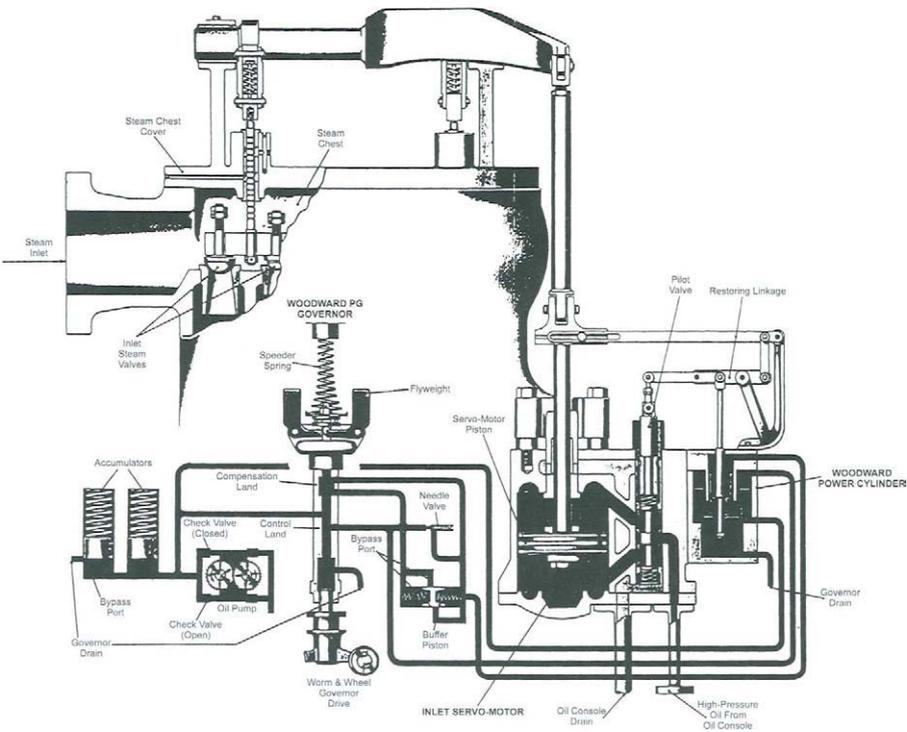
Typical mechanical-hydraulic governor for turbine drive (Courtesy of Elliott/Woodward)
